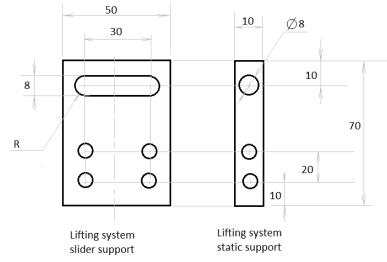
The lifter system supports for the vehicle version 2, measurements. Unmarked holes are standard holes for this design, diameter 6mm.
